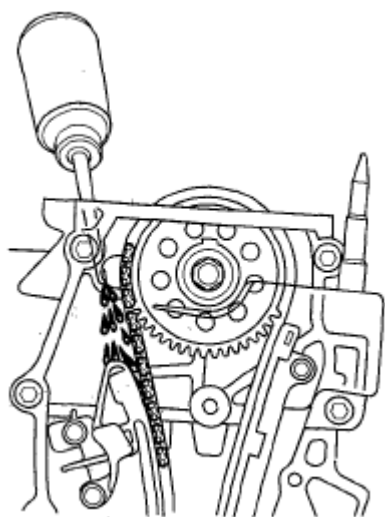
Applying Engine Oil To Sliding Surface Of Cam Chain Tensioner Through Oil Return Hole In Cylinder Head
